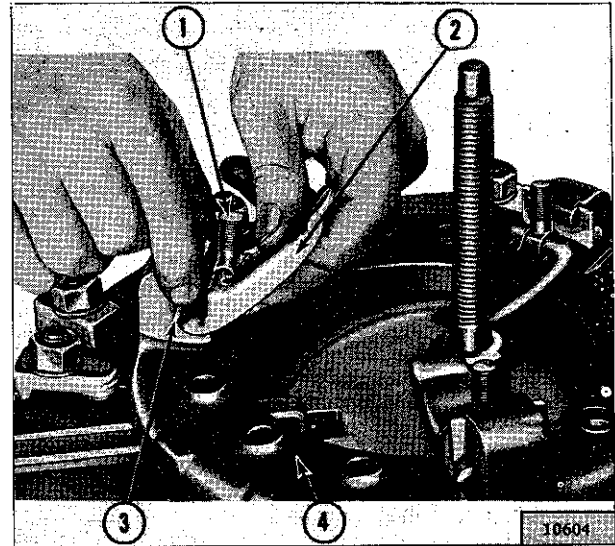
ASSEMBLING LEVERS ON CLUTCH PRESSURE PLATE
